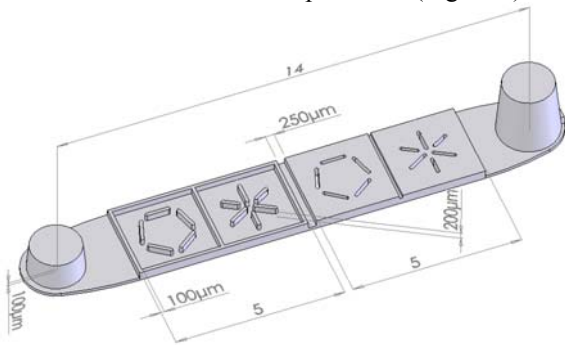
Sample test part for microinjection tests (dimensions in mm)
